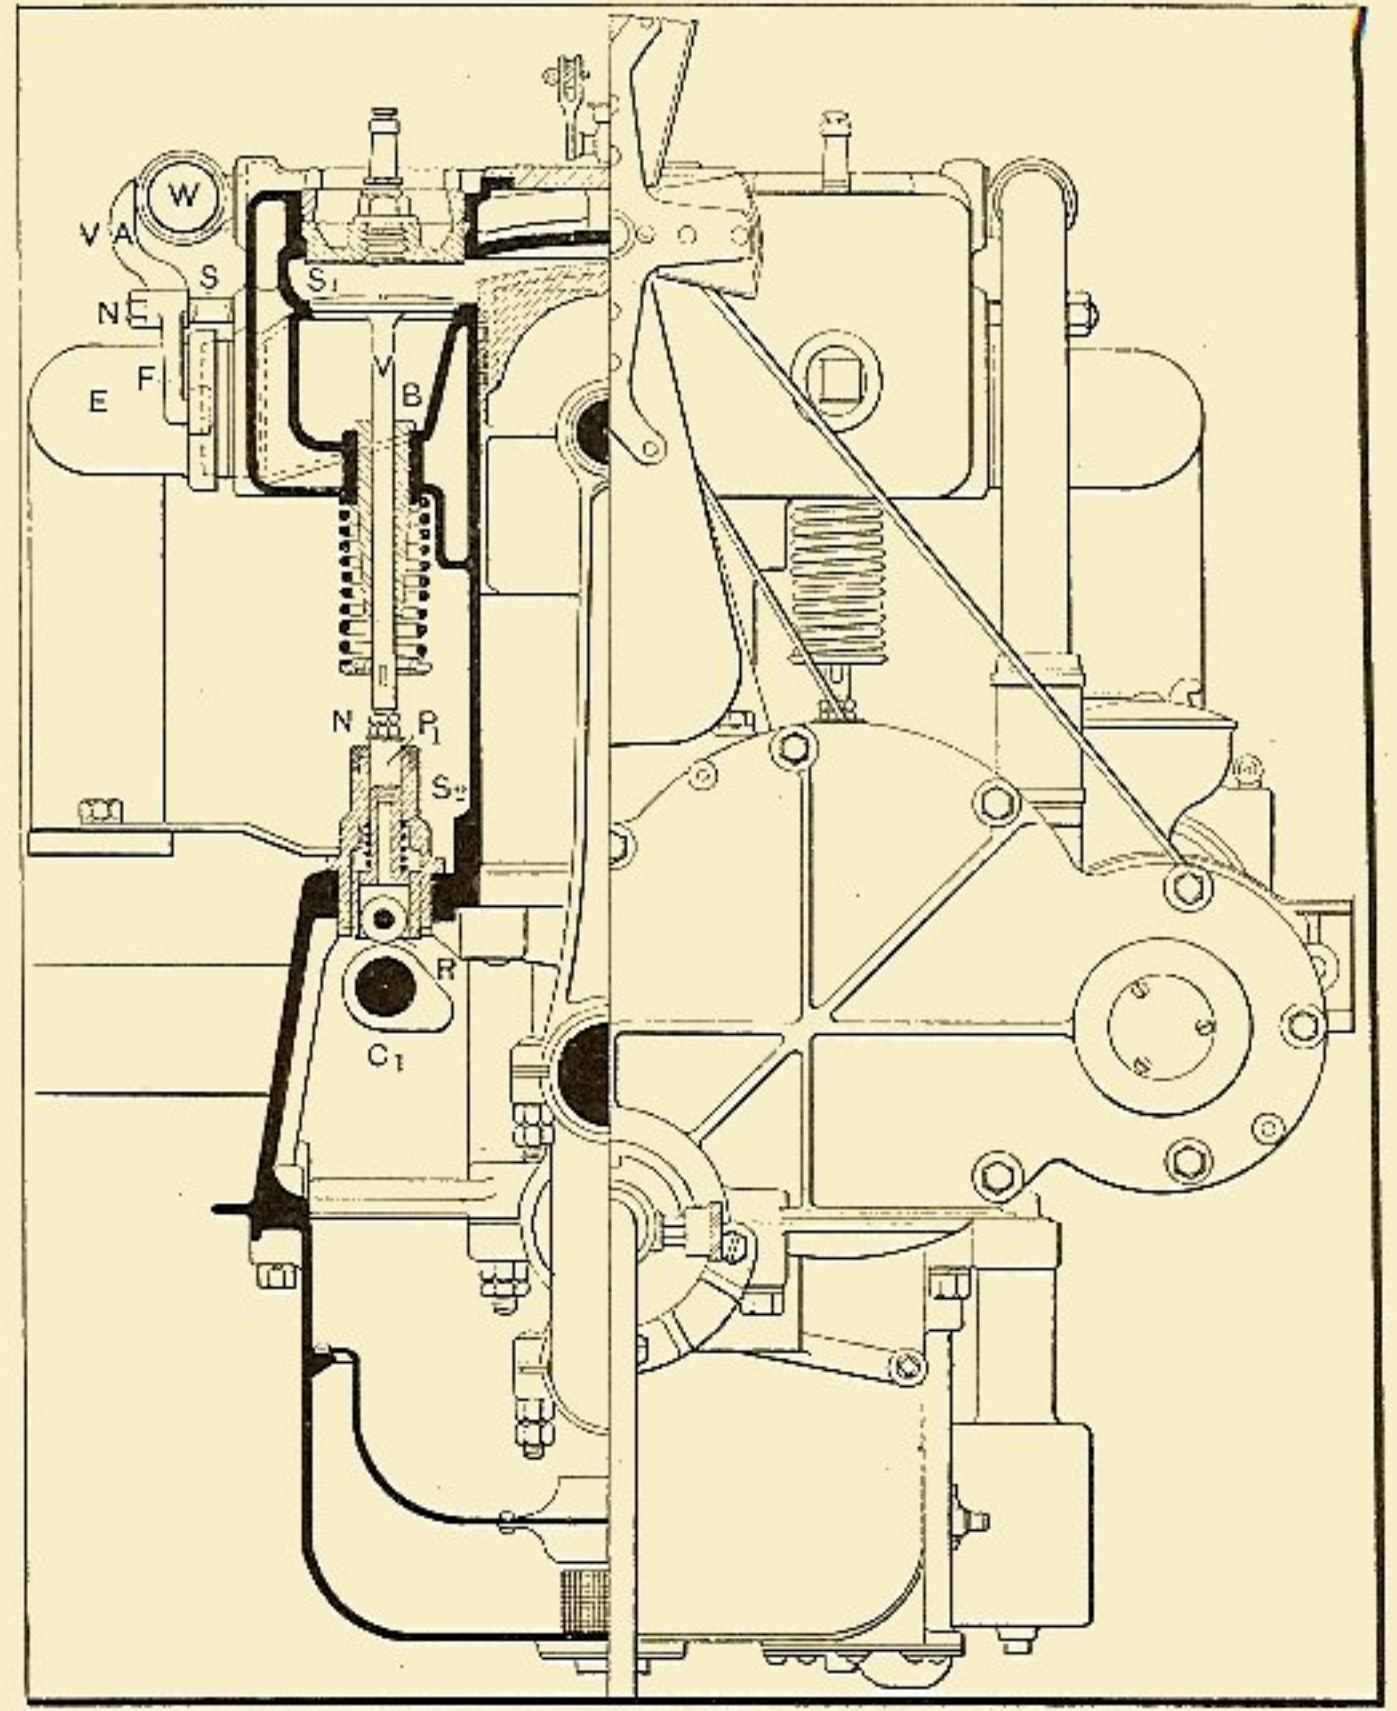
Front transverse section through an engine cylinder and part of the base-chamber
